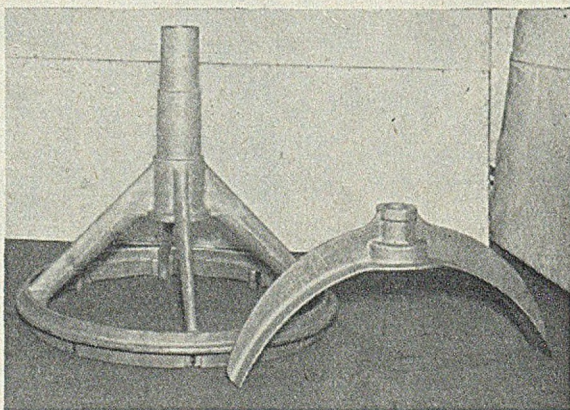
DRUM END AND BRIDGE BRACKET FOR PAPER-MAKING MACHINERY.
